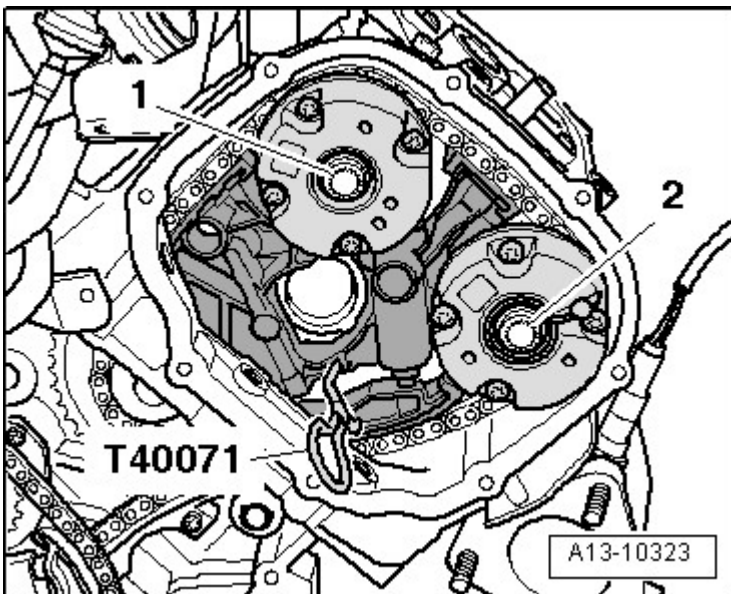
Identifying Bolts On Right Cylinder Head And Removing Both Camshaft Adjusters
